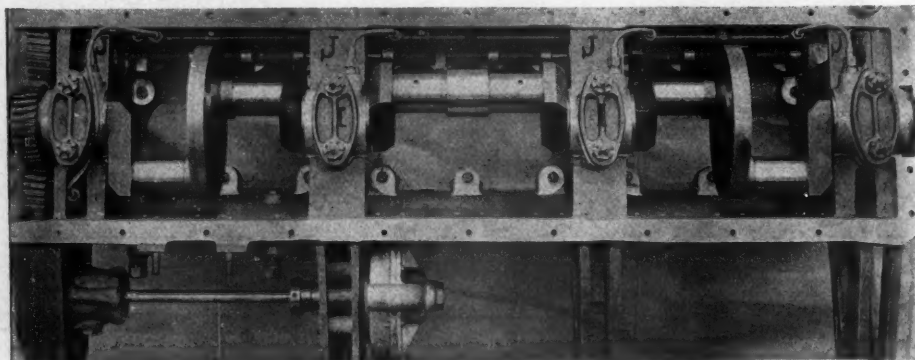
NAPIER CRANKCASE, LOWER PORTION REMOVED TO SHOW CRANKSHAFT SUPPORT
